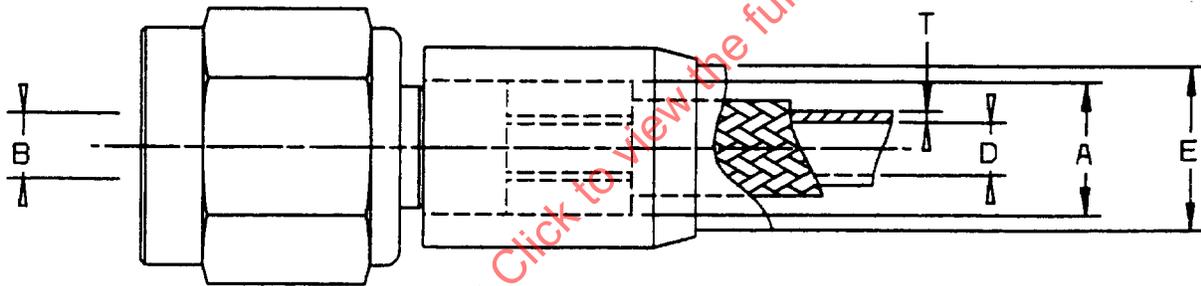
Hose and Fitting Dimensions (Table 2)
